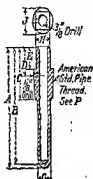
Plain Thermometer Well. Fig. 2.—Finned Thermometer Well.
